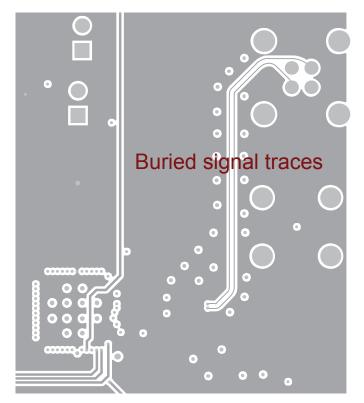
DS90UB921-Q1 Serializer Example Layout, Inner Layer
